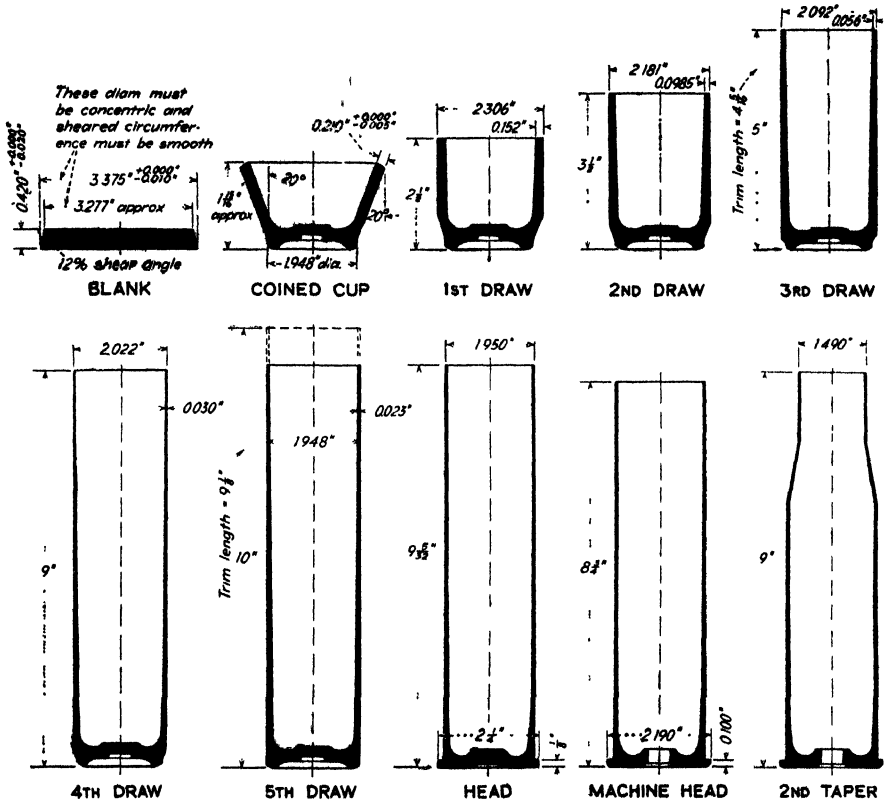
Five draw operations to cold-form a 37-mm. steel cartridge case of the type shown. Mild steel blanks are used.
